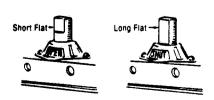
PINION ASSEMBLY ORIENTATION.
